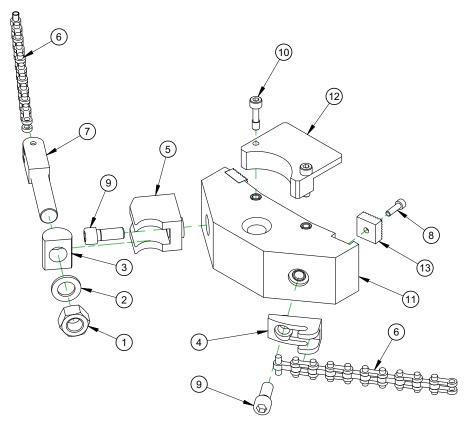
OD MOUNT ASSEMBLY 38-63" (965-1,600 MM) (P/N 80477)
